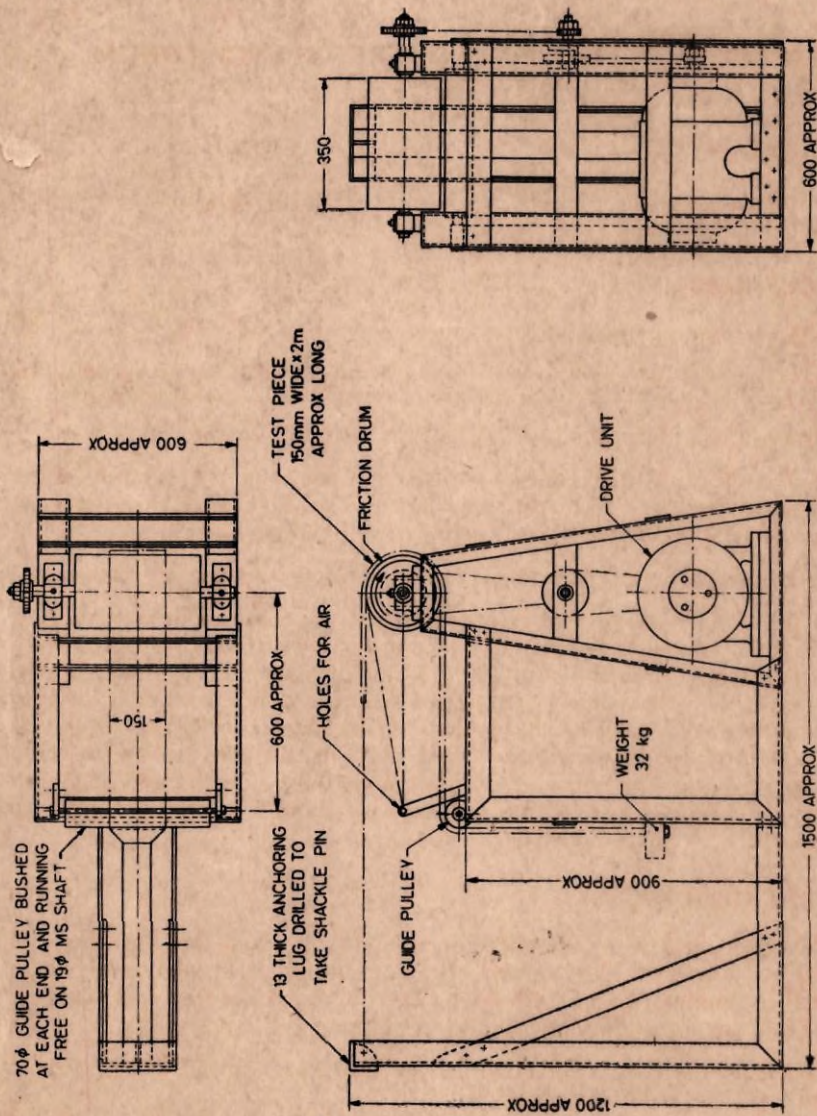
APPARATUS FOR DRUM FRICTION TEST
